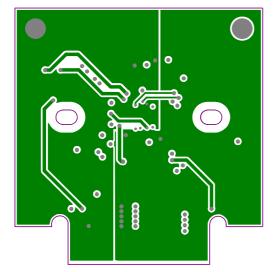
epc635 Card Edge Connector Carrier: Layout top and bottom
